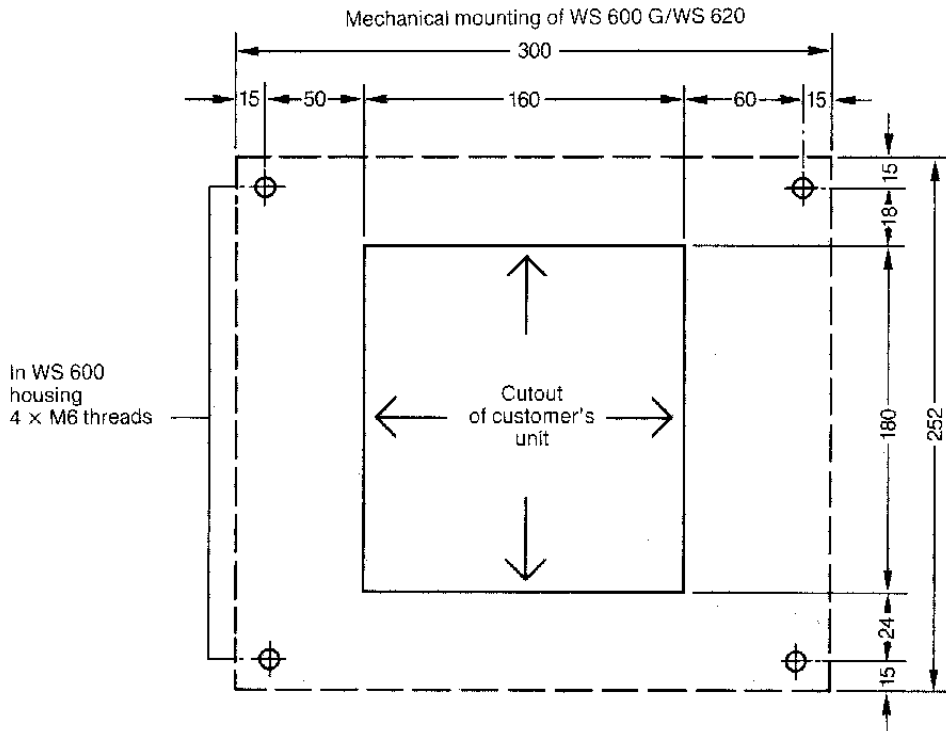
Dimensions for fitting WS 600 G/WS 620 in switchgear cabinet
